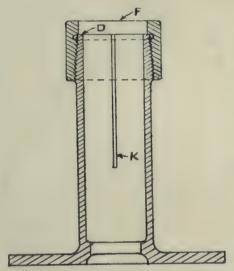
Sectional Elevation of Port Drilling Jig.
